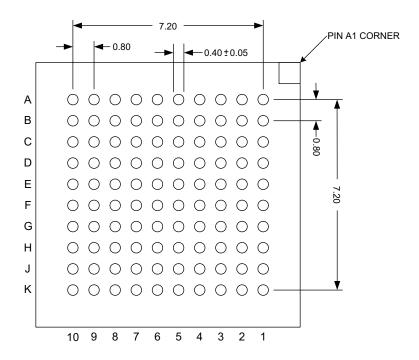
MQ-1100 BGA Package - Bottom View with Dimensions in Millimeters
